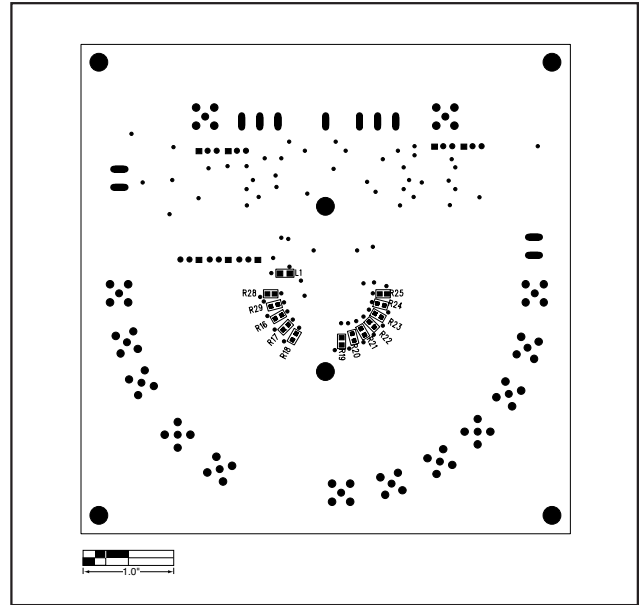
MAX5183 EV Kit Component Placement Guide—Solder Side
